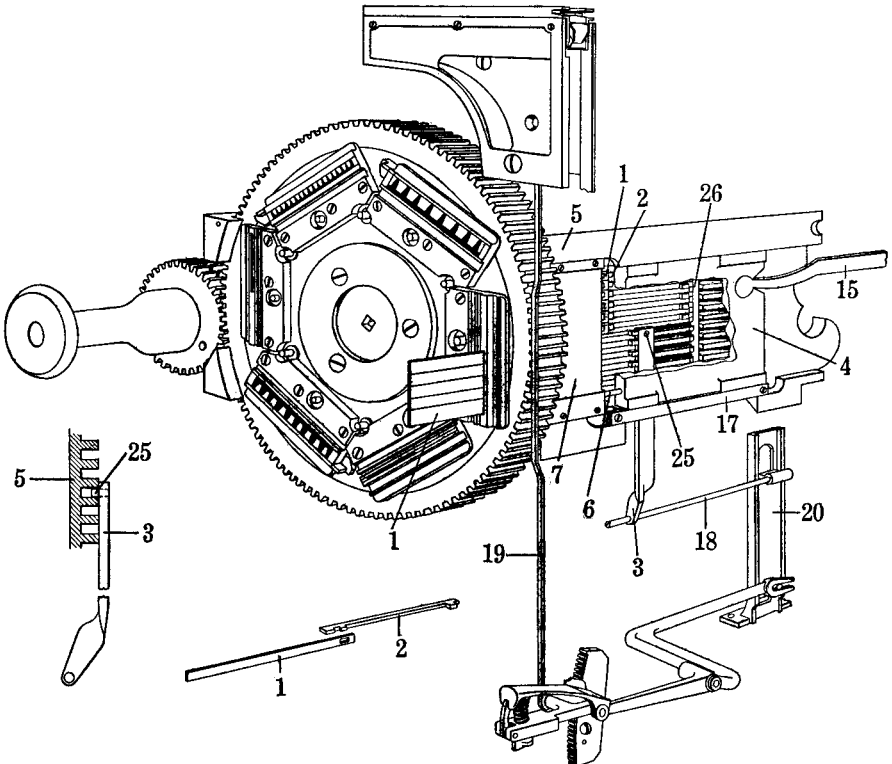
Showing in detail the mechanism of the universal ejector blade with the  $24\frac{1}{2}$ -em six-mold disk. The mechanism is exactly the same when used with the four-mold or the 30-em six-mold disks.
